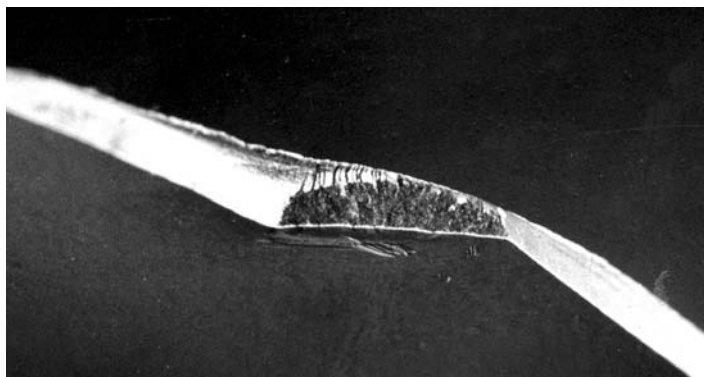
Close-up view of the discolored area on the fracture surface of the failed blade
